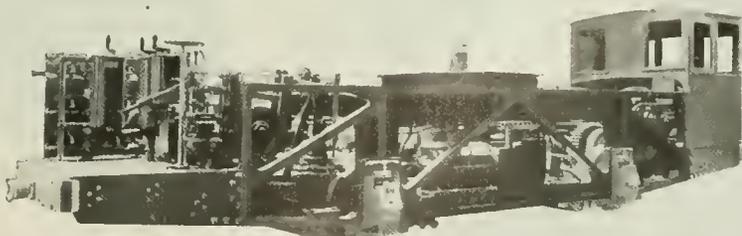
A View of the Locomotive Shown in Fig. 36, but Taken from the Opposite Side, with Covers and One Cab Removed Showing the Controllers and Front of One Control Panel
